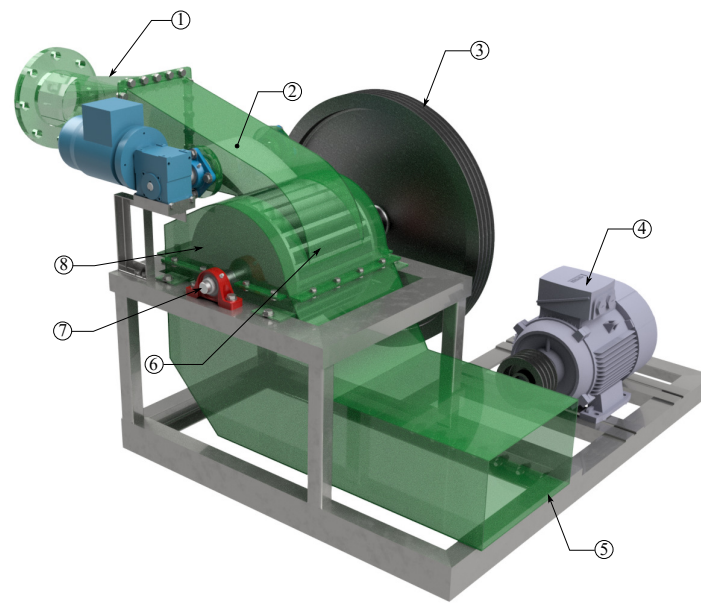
Component of a cross-flow turbine: 1—Nozzle; 2—Inner guide vane (GV); 3—Transmission (belts and pulley drives); 4—Generator; 5—Draft tube; 6—Runner; 7—Shaft; 8—Casing.
